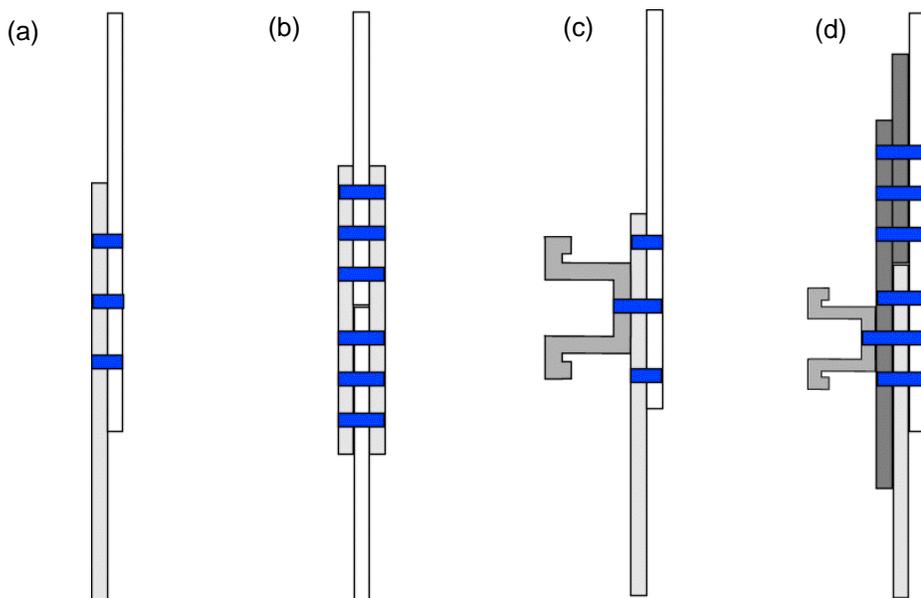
Typical multilayer joints in aerospace fuselage structures: (a) simple lap joint, (b) three layer splice joint, (c) lap joint with stringer, (d) lap splice joint with stringer and additional reinforcements.
